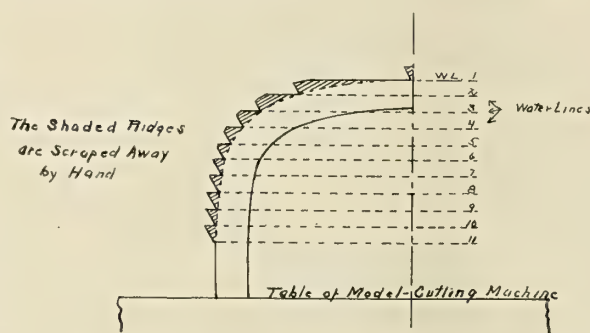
CROSS SECTION LEFT BY MODEL CUTTING MACHINE.
